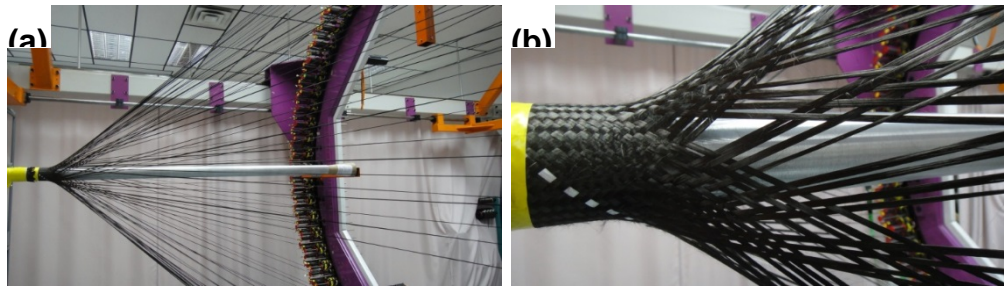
Processing of the carbon fiber sleeve using a braiding machine.
